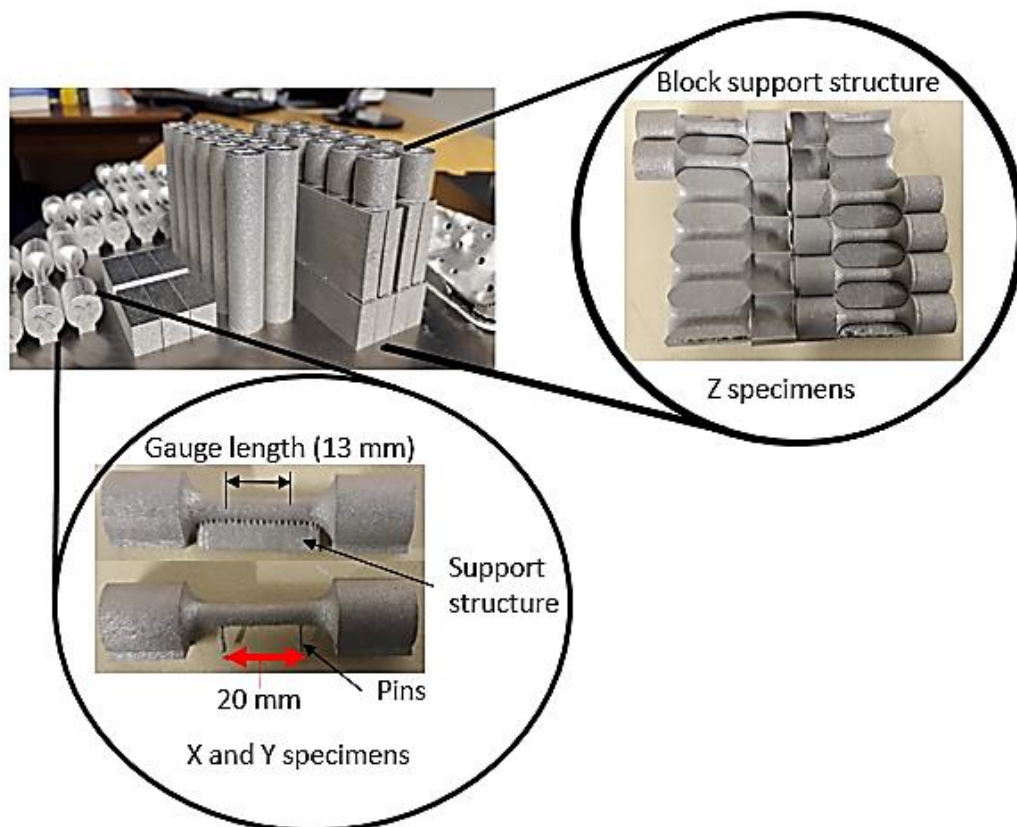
A detailed view of the tensile and HCF specimens built from Ti6Al4V(ELI) through EOSINT M280
